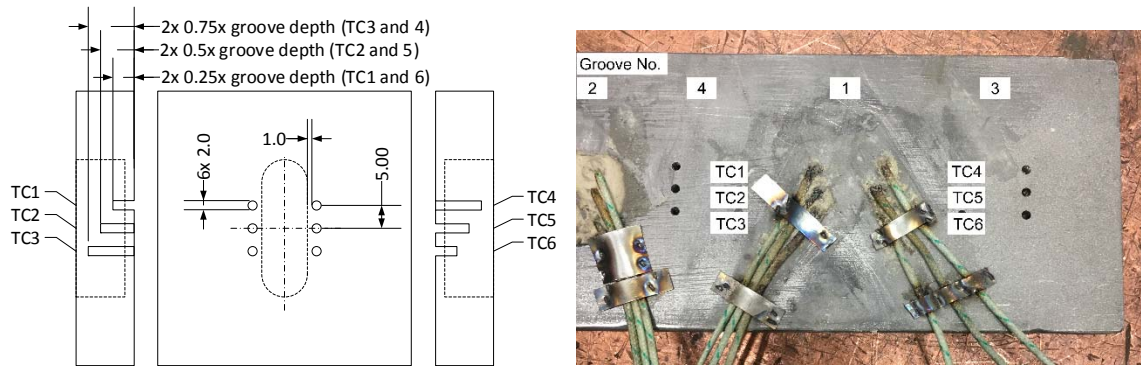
(a) Dimensions and positions of holes for thermocouple placement; (b) Groove 1 with attached thermocouples TC1-6.
